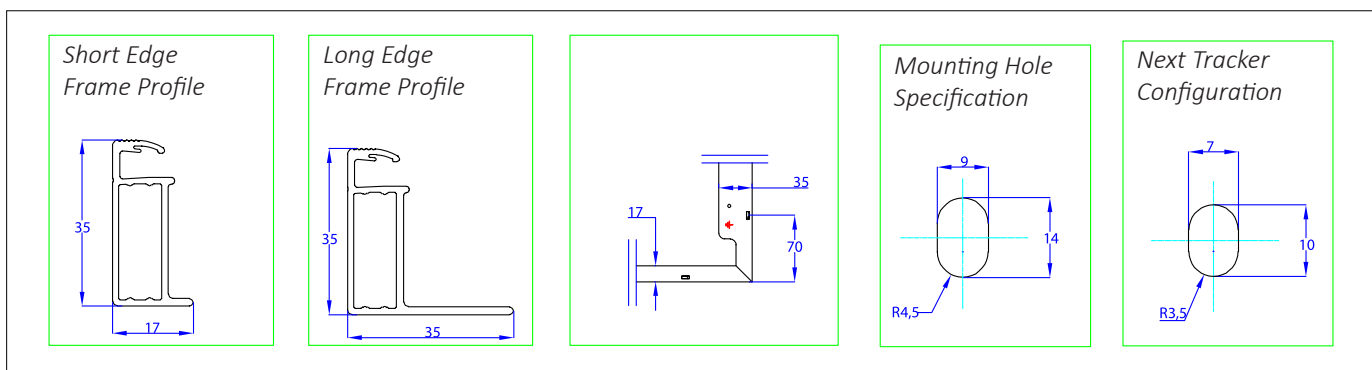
Aluminum (Glass-Glass) 2382/1134
